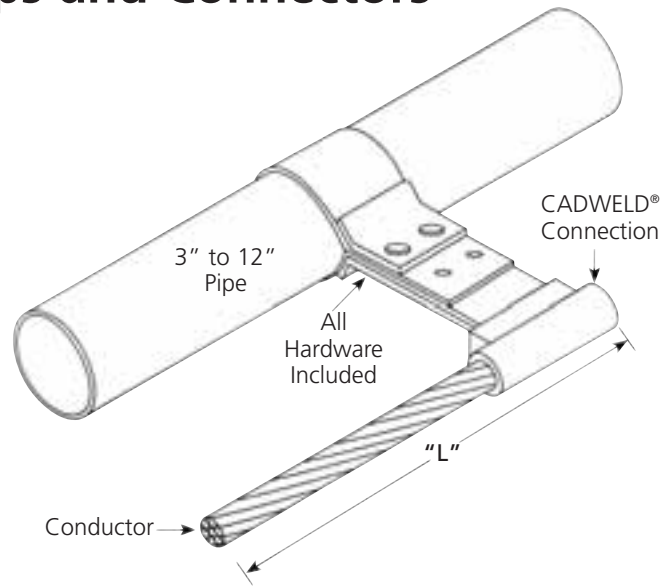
ERITECH Pipe clamp fitted to metal pipe with conductor stub CADWELD exothermically welded to copper conductor.
